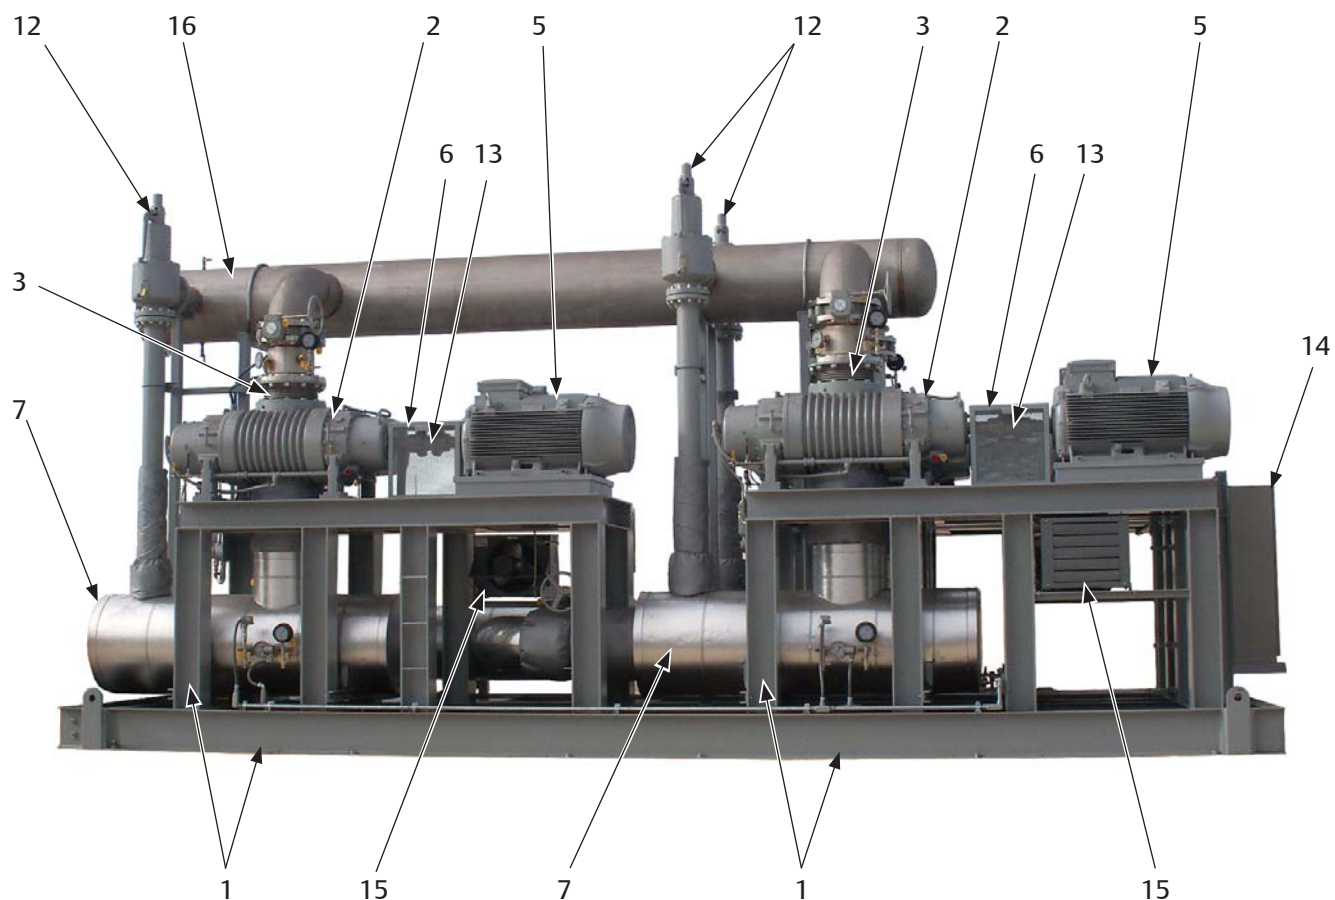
Custom Blower Package Components (Multiple Blowers - Direct Drive)
